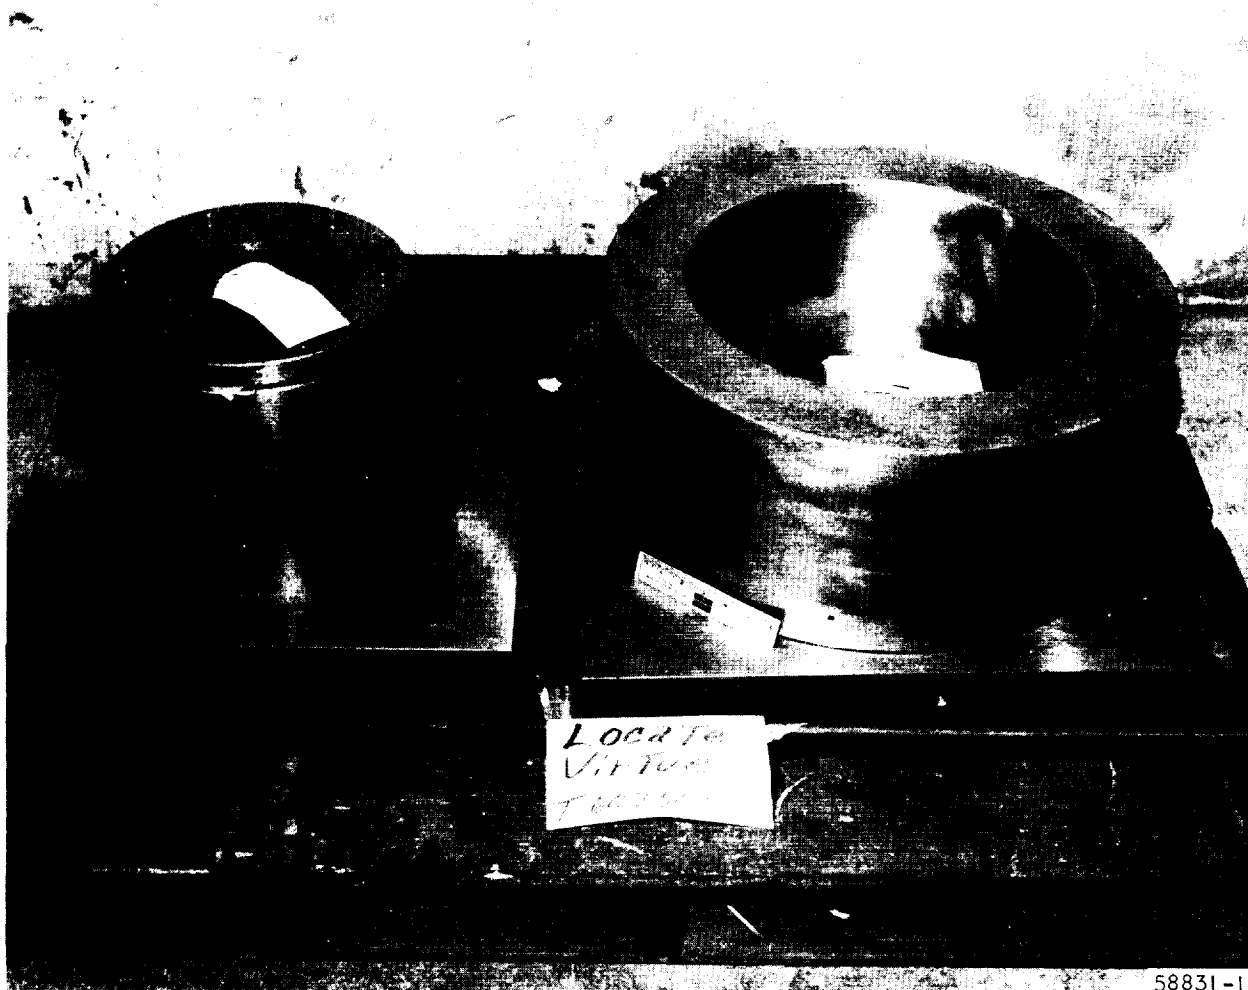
Final Sizing Die (Tool No. T-607307)
